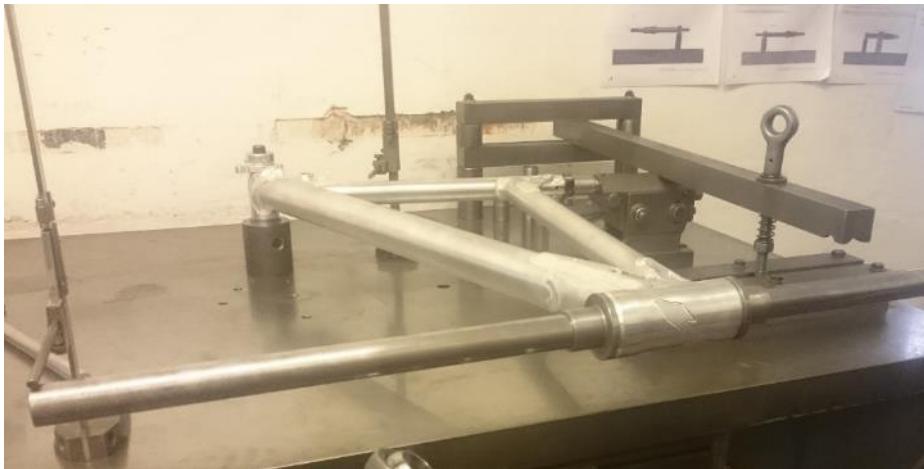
Checking of co-planarity of head tube axis and seat tube axis.
